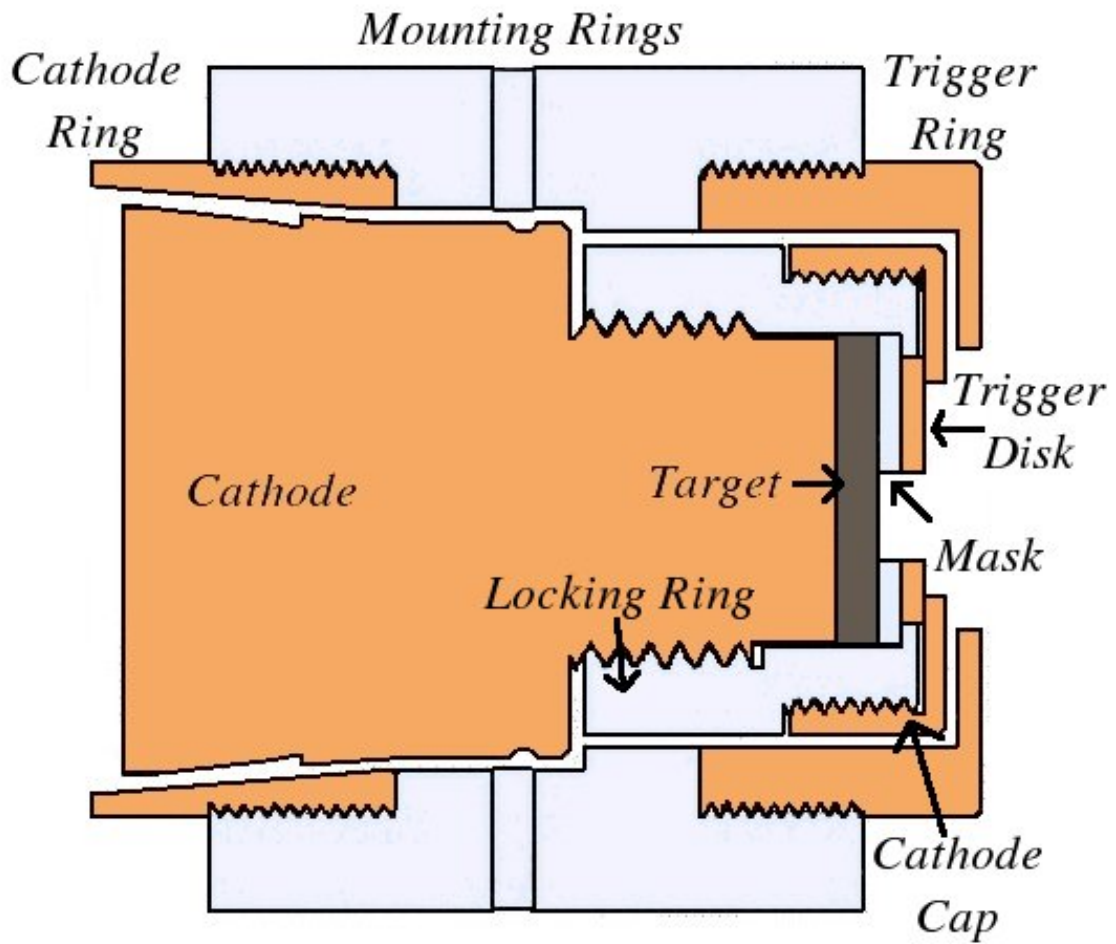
Schematic of the ion source assembly. Materials are color-coded, with the lightest color as Macor, the mid-tone as copper, and the dark shade as boron carbide. Not pictured is the interior of the cathode base, hollowed out and grooved to accommodate insertion and removal from the trap.
